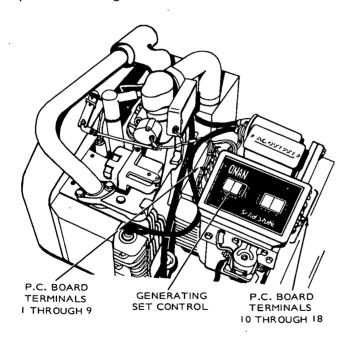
GENERATOR SET CONTROL ASSEMBLY
